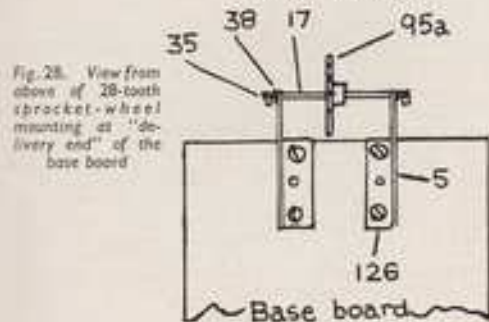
B. View from above of 28-tooth sprocket-wheel mounting at "delivery end" of the base board
